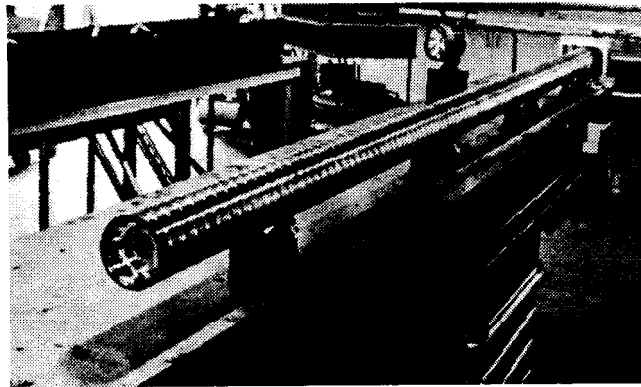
Test Module 3.7 m long mounted on a massive Bench of Steel
